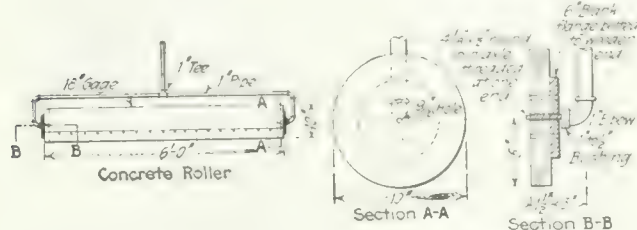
ROLLER SHEET STEEL ON WOOD ENDS
